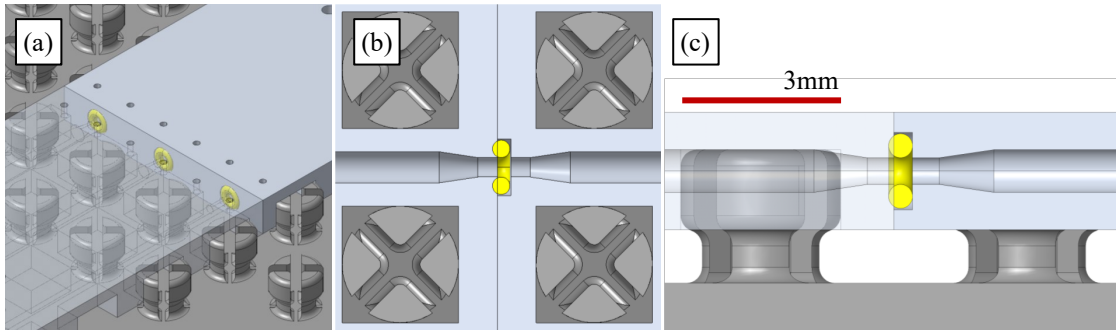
Optimised design of the interconnection. (a) Isometric view, (b) top section view and (c) lateral section view of the O-ring face seal.
